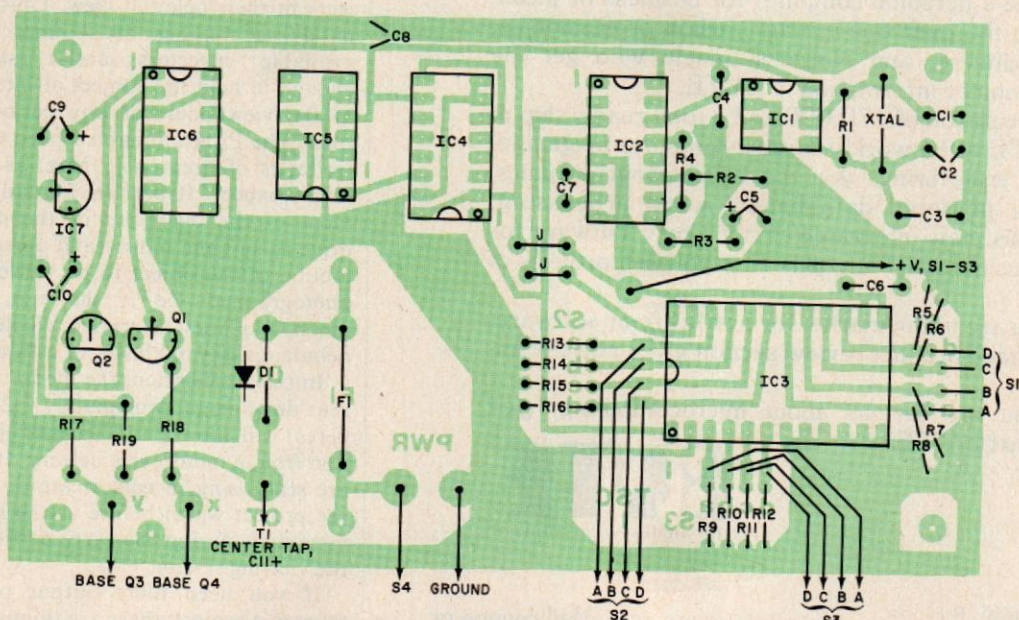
Use this guide to assemble the components on the printed-circuit board.
